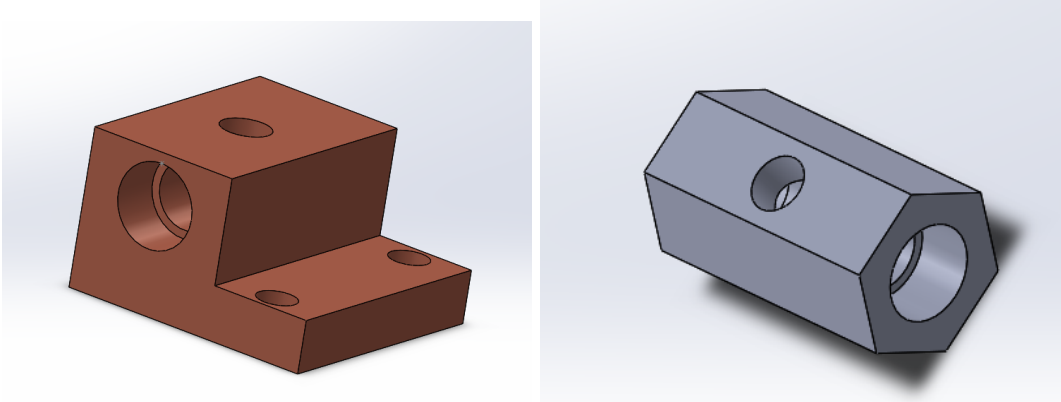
a (left): Two designs for the exterior shape of the epoxy filters, showing the holes at the ends for the SMA connectors, and the filling hole in the top. The cavity where the epoxy is poured into has a slightly smaller radius than the connector holes, and is partially visible in both designs.
